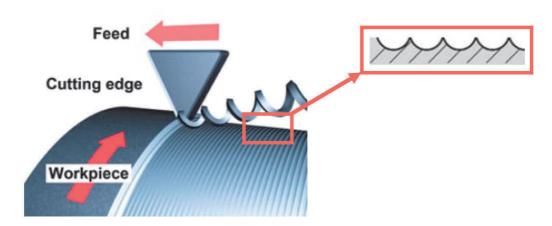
Turning surface definition (right - general definition, left - detail of machined surface) [4,5]
